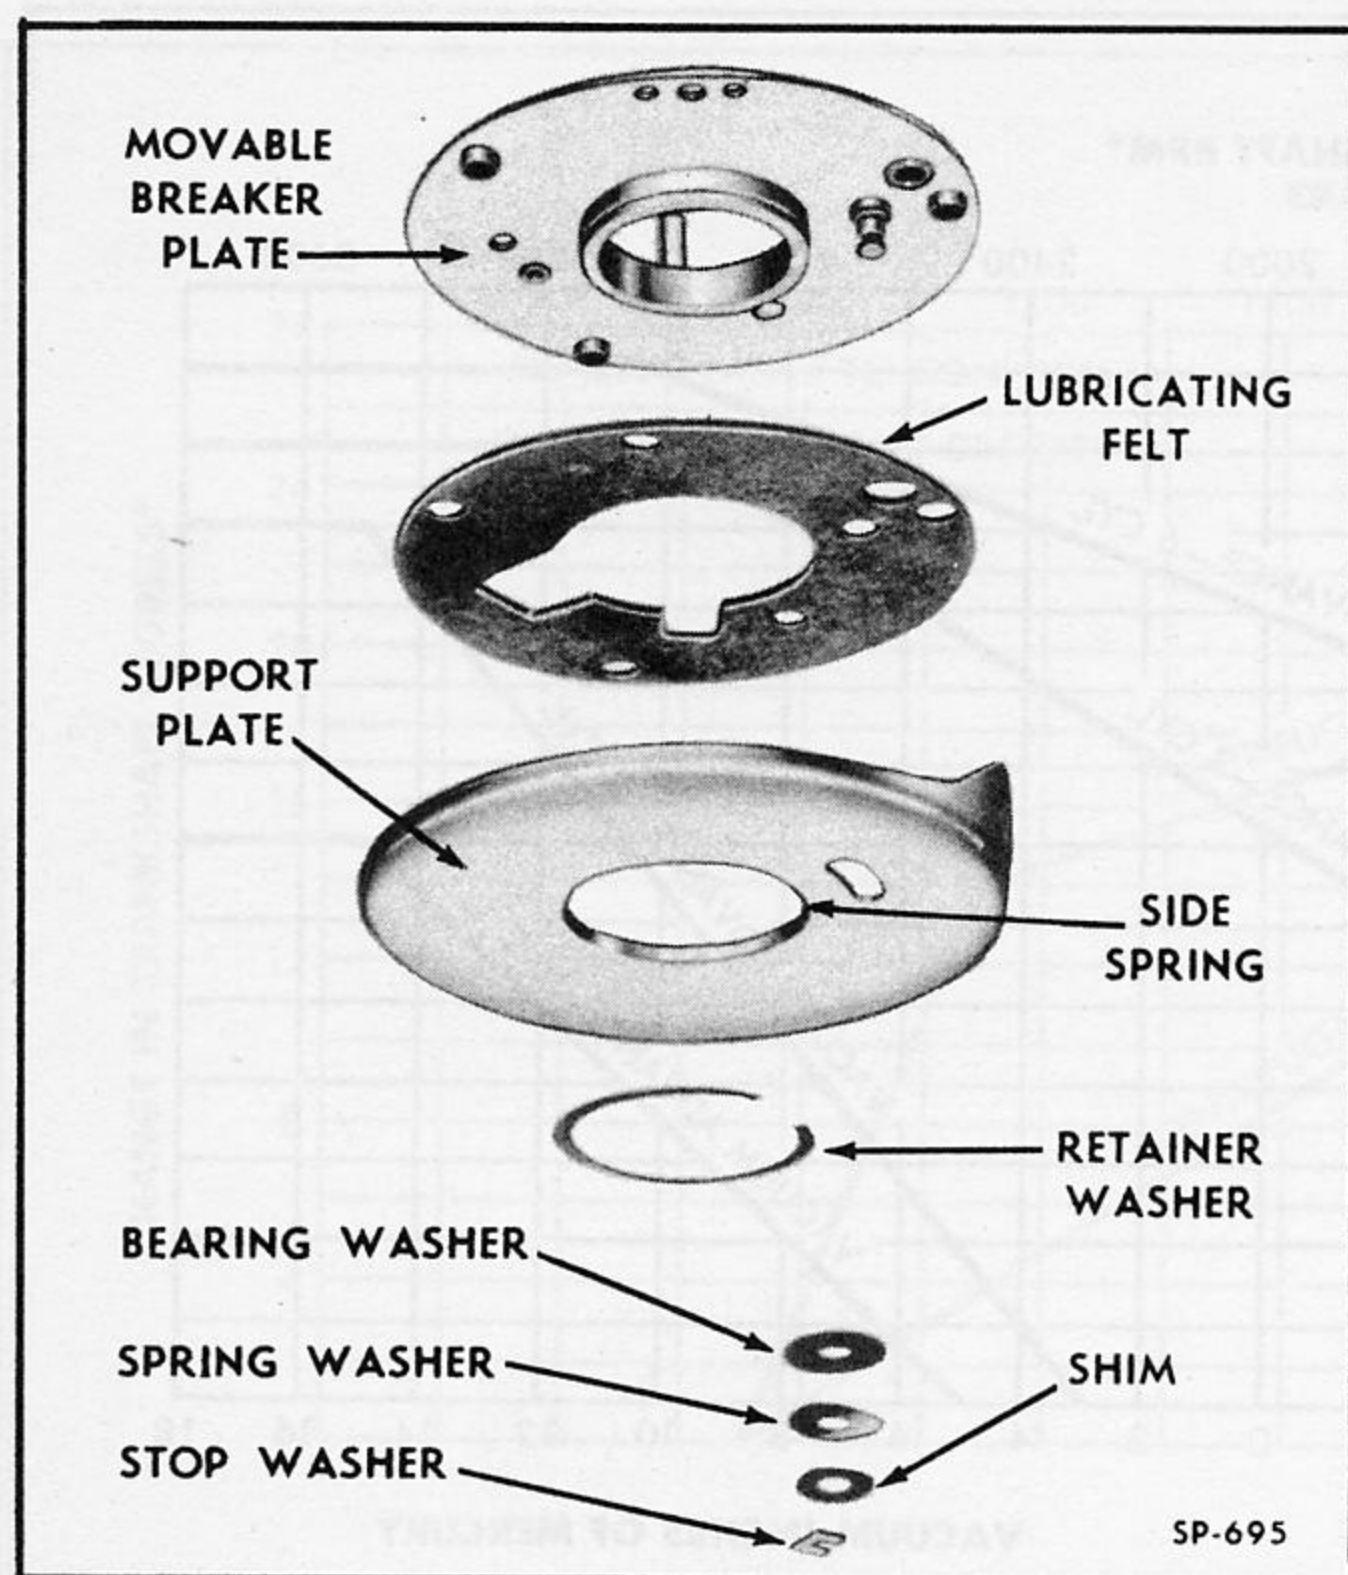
Delco-Remy Distributor Breaker Plate—Exploded View
